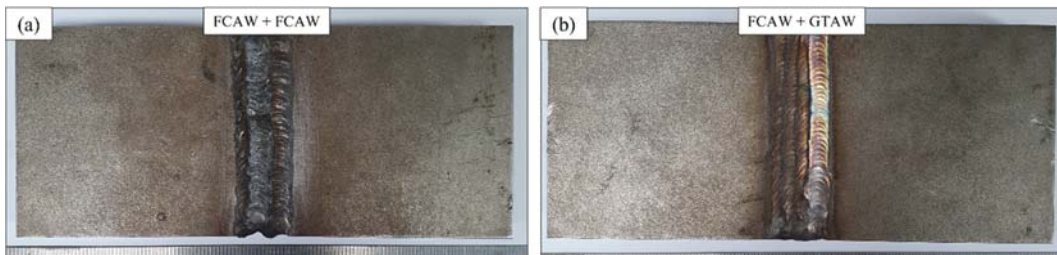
Appearance of X groove after welding (a) FCAW + FCAW and (b) FCAW + GTAW STS 316L/A516-70N.
